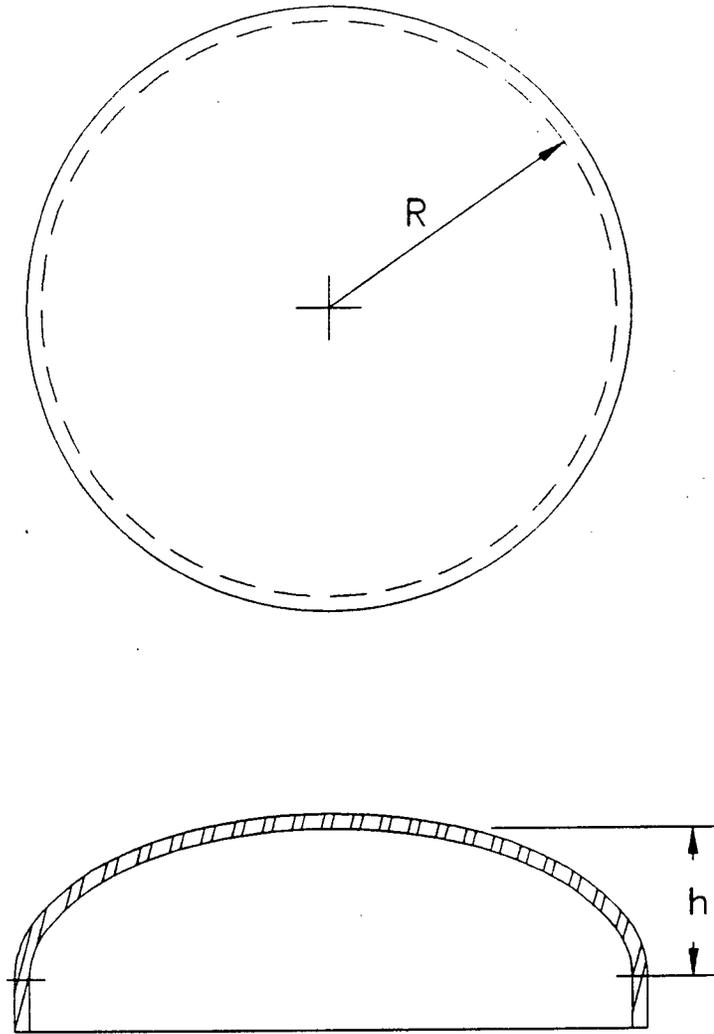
Typical ellipsoidal head used on cylindrical cargo tanks. Ellipsoidal heads may also be used on tanks having elliptical cross section.
